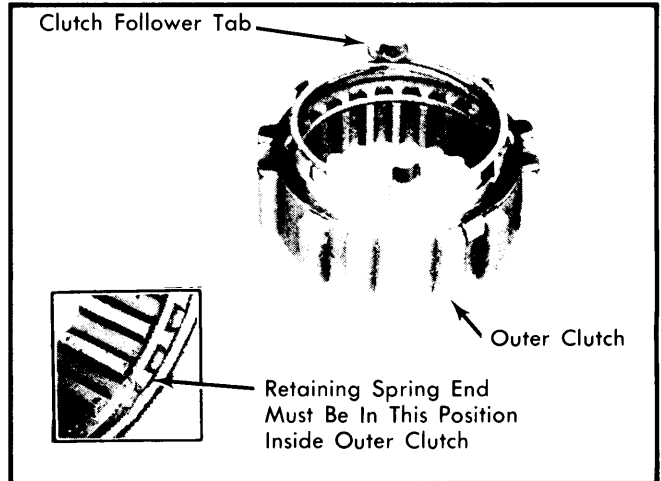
Installing Retaining Spring & Clutch Follower to Outer Clutch With Inset Showing Inner Spring End
